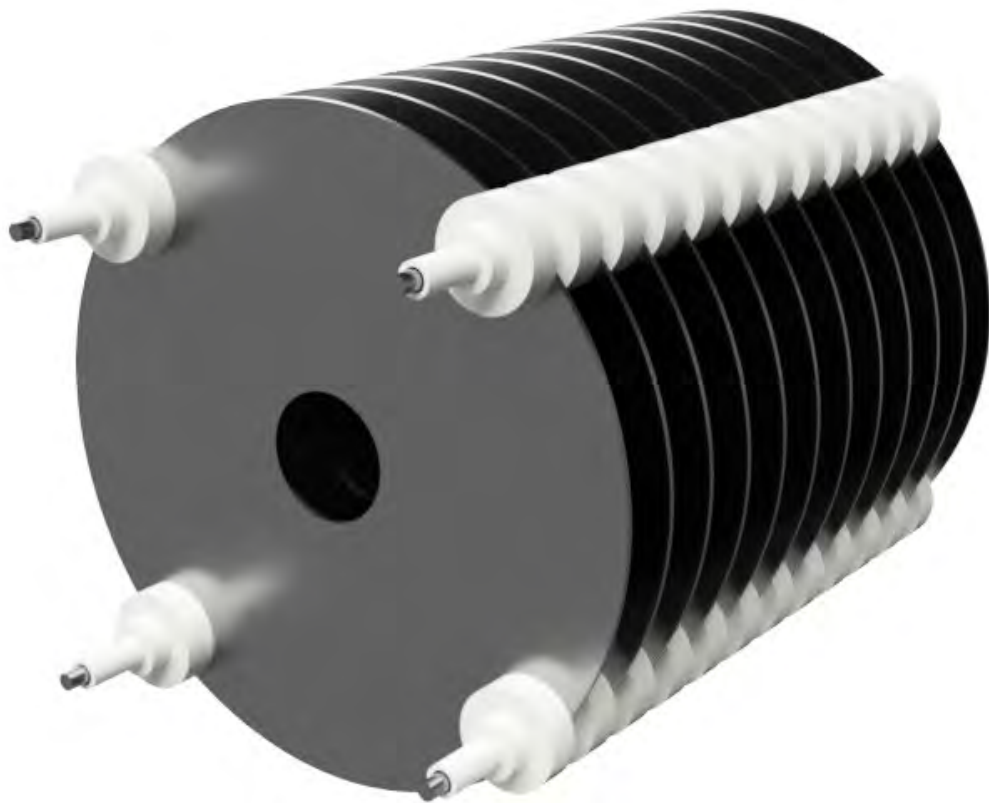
The VMI plates held on a threaded rod covered by a ceramic shield and separated by ceramic spacers, attached to the chamber via the threaded rod inside the ceramic shield.
